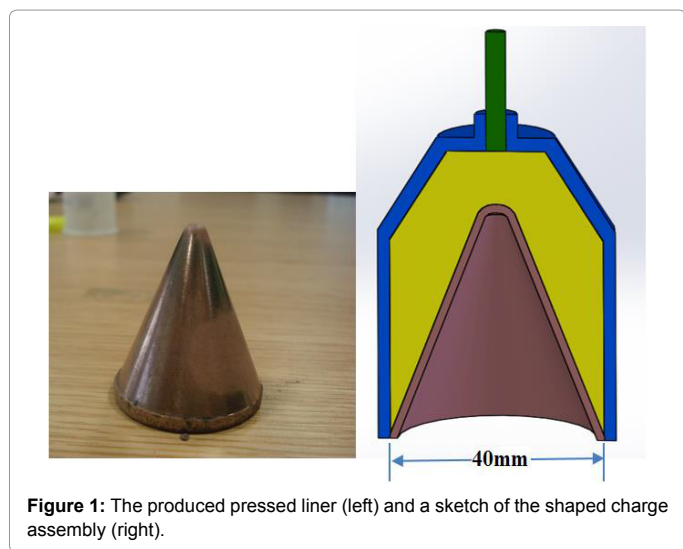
The produced pressed liner (left) and a sketch of the shaped charge assembly (right).
